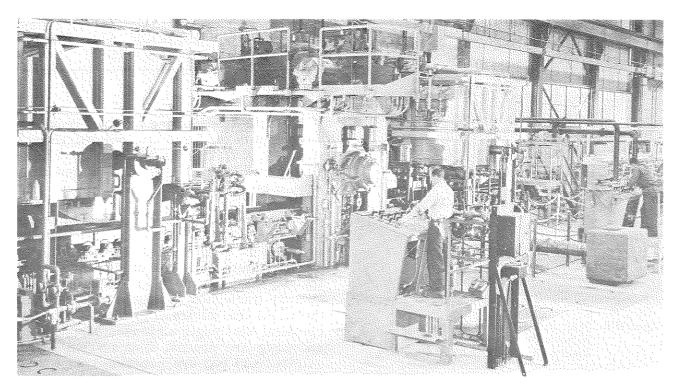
Hot Reversing Strip Mill Showing Operator's Console in Foreground.
